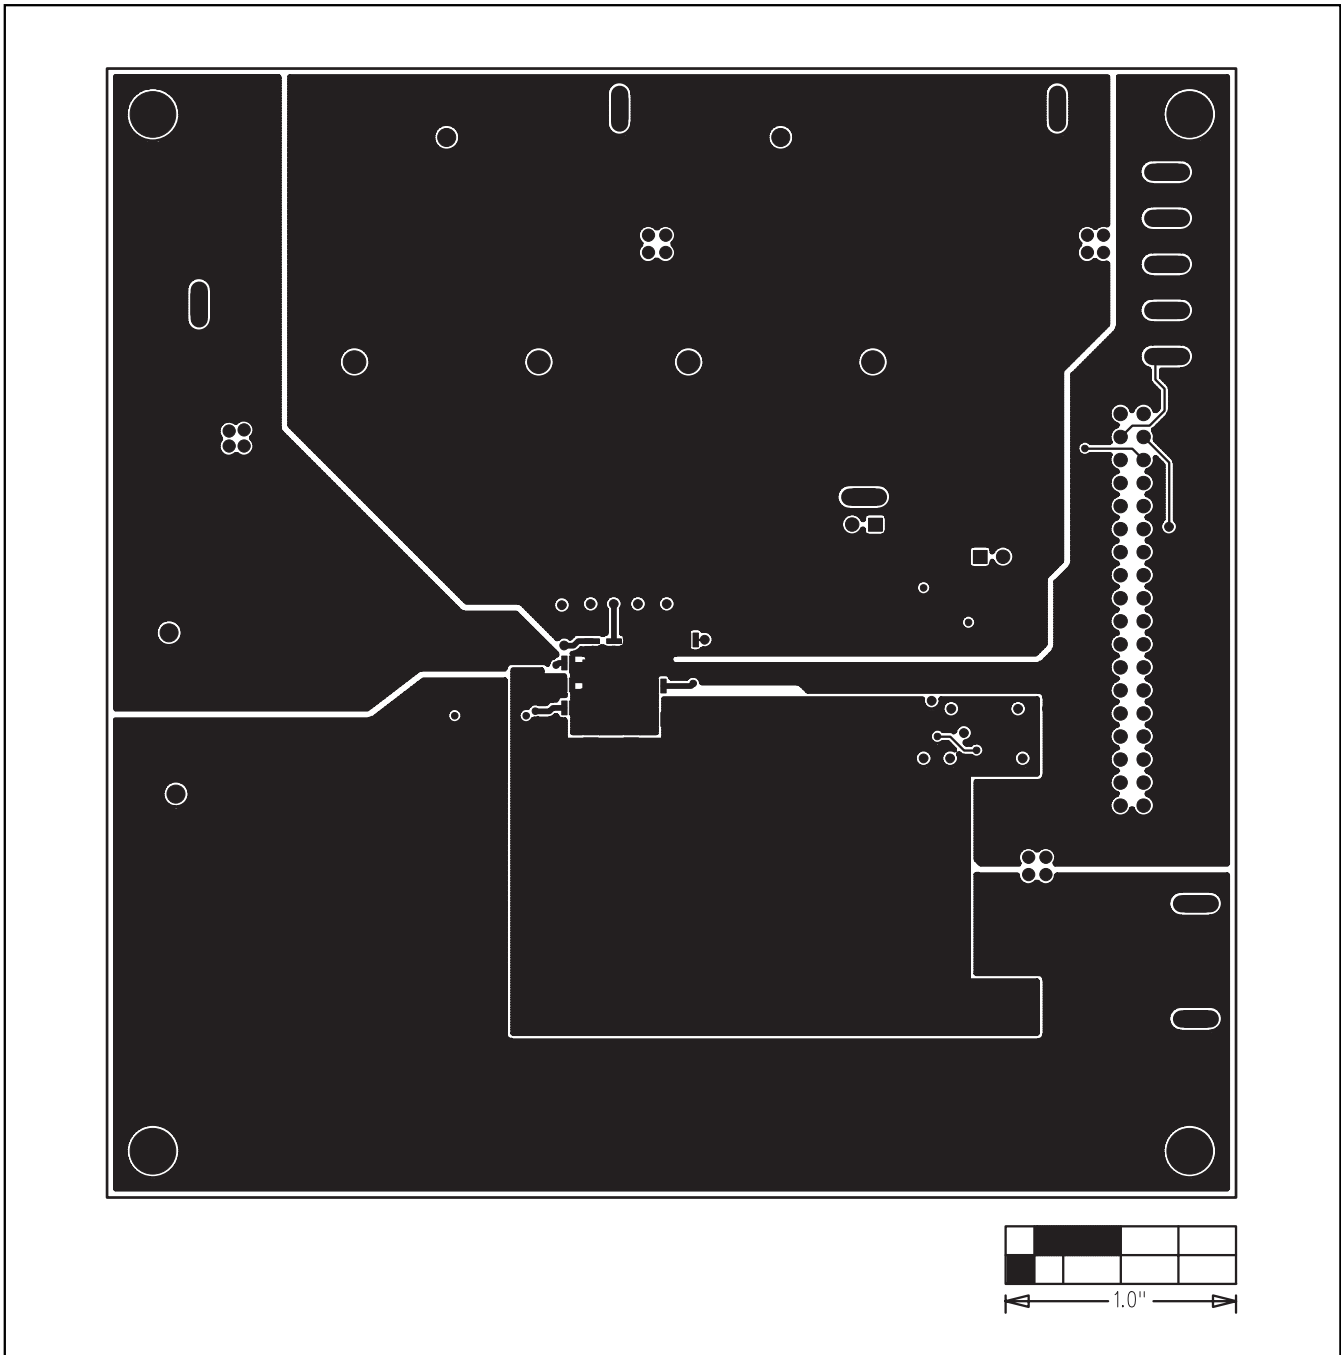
MAX5893/MAX5894/MAX5895 EV Kit PC Board Layout—Solder Side
